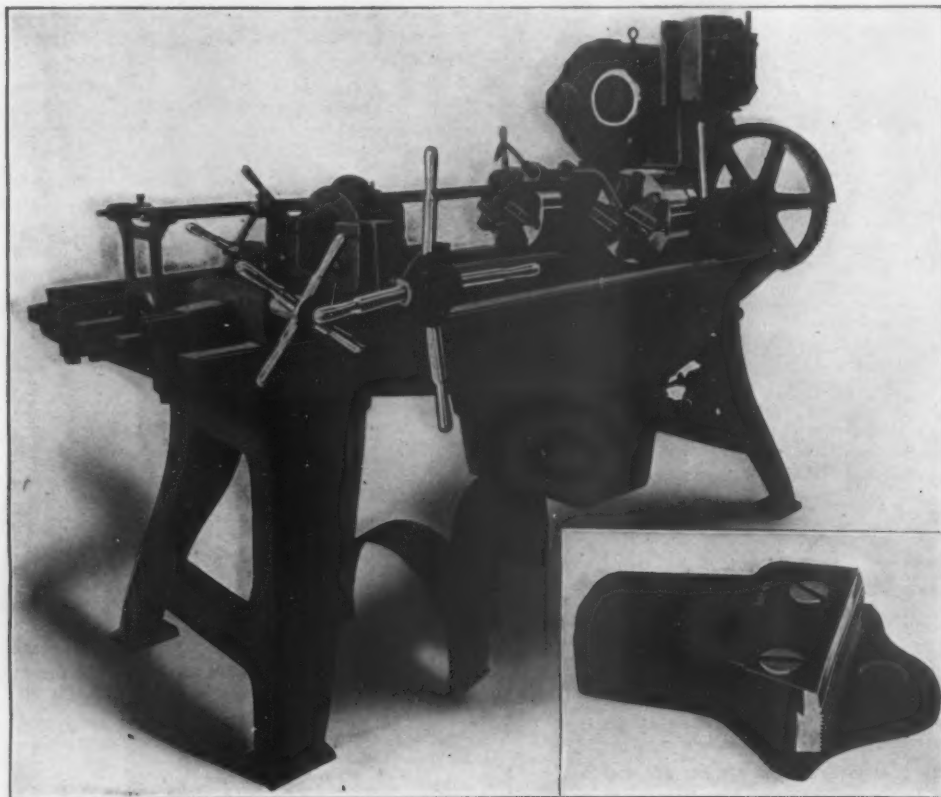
A $1\frac{1}{2}$ -In. Staybolt Cutter Equipped with an Adjustable Speed Motor, Built by the Landis Machine Company, Waynesboro, Pa.
